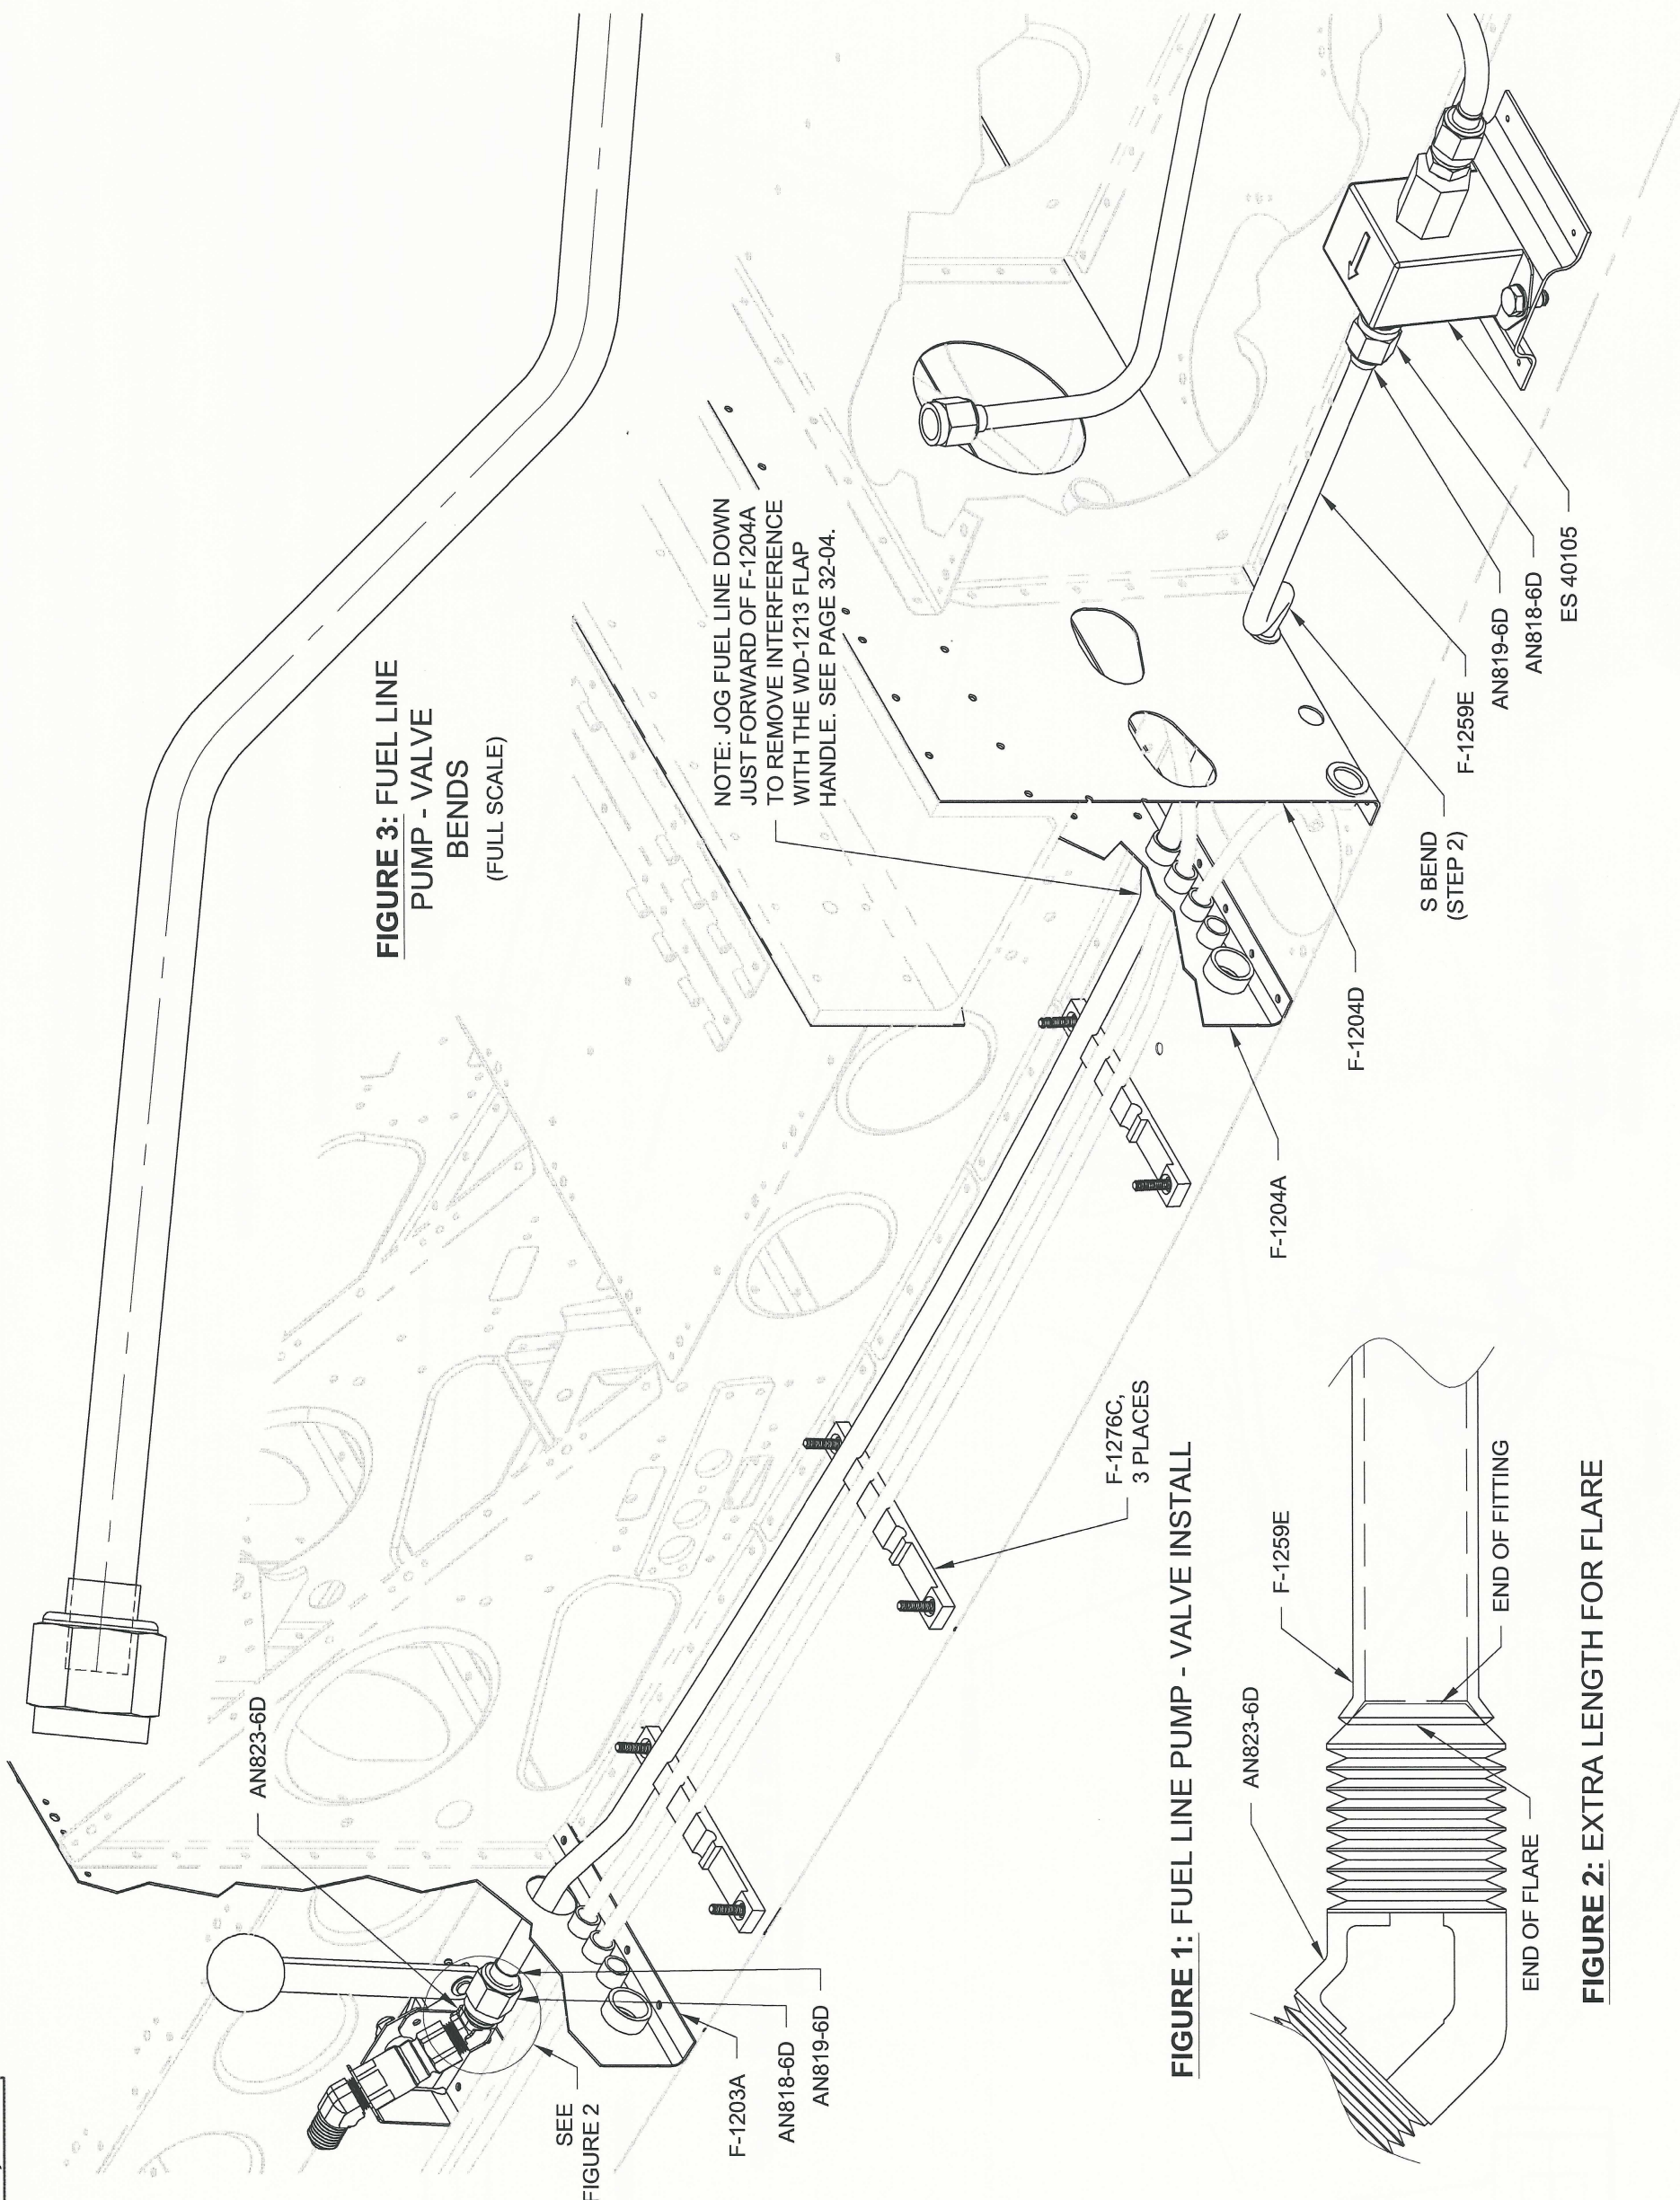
FUEL LINE PUMP - VALVE INSTALL
